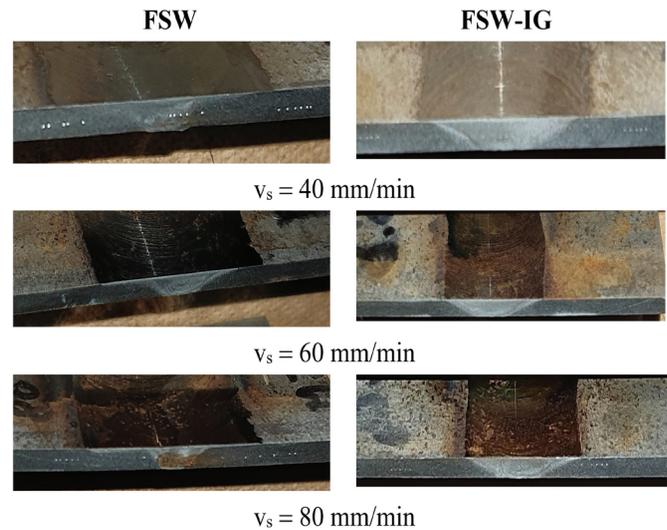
Macroscopic appearance of FSW and FSW-IG welds
